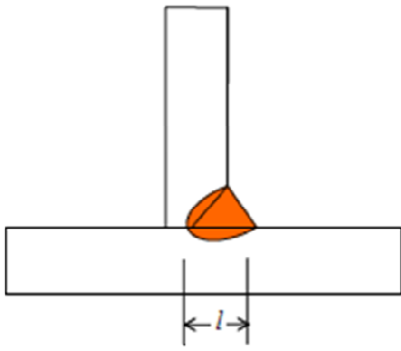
A T-joint, where the weld zone is acting to pull the T out of perpendicular.
